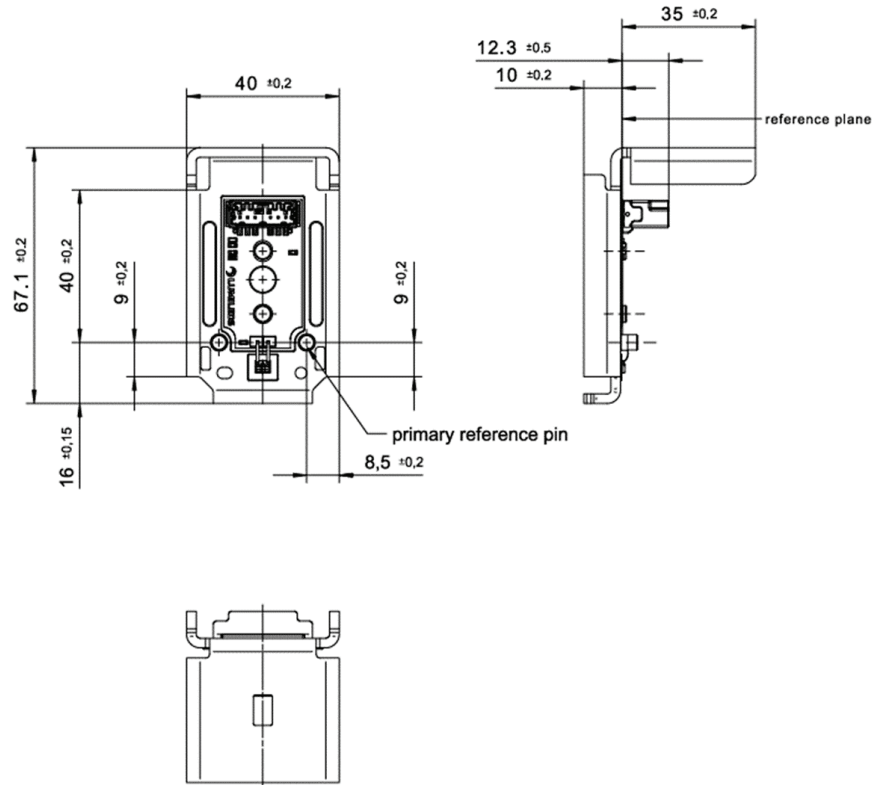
Mechanical dimensions in mm of the LUXEON Go 1x3 master module with heatsink type A
